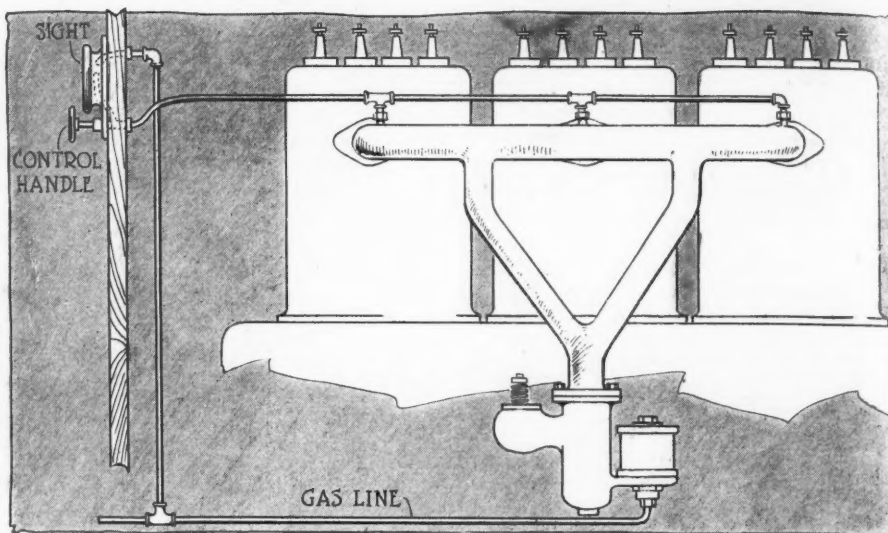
NEW WEBB JAY PRIMER INSTALLED IN A SIX-CYLINDER HAYNES
